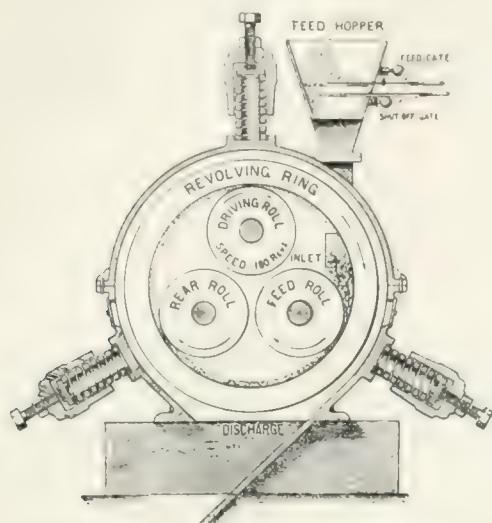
CROSS-SECTION VIEW OF A KENT MILL
